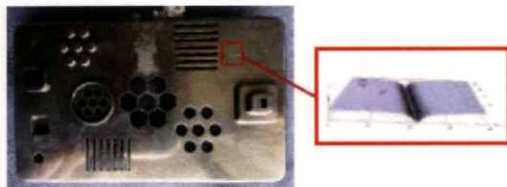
The position of weld line's V-notch investigated by means of the 3D laser measuring microscope
